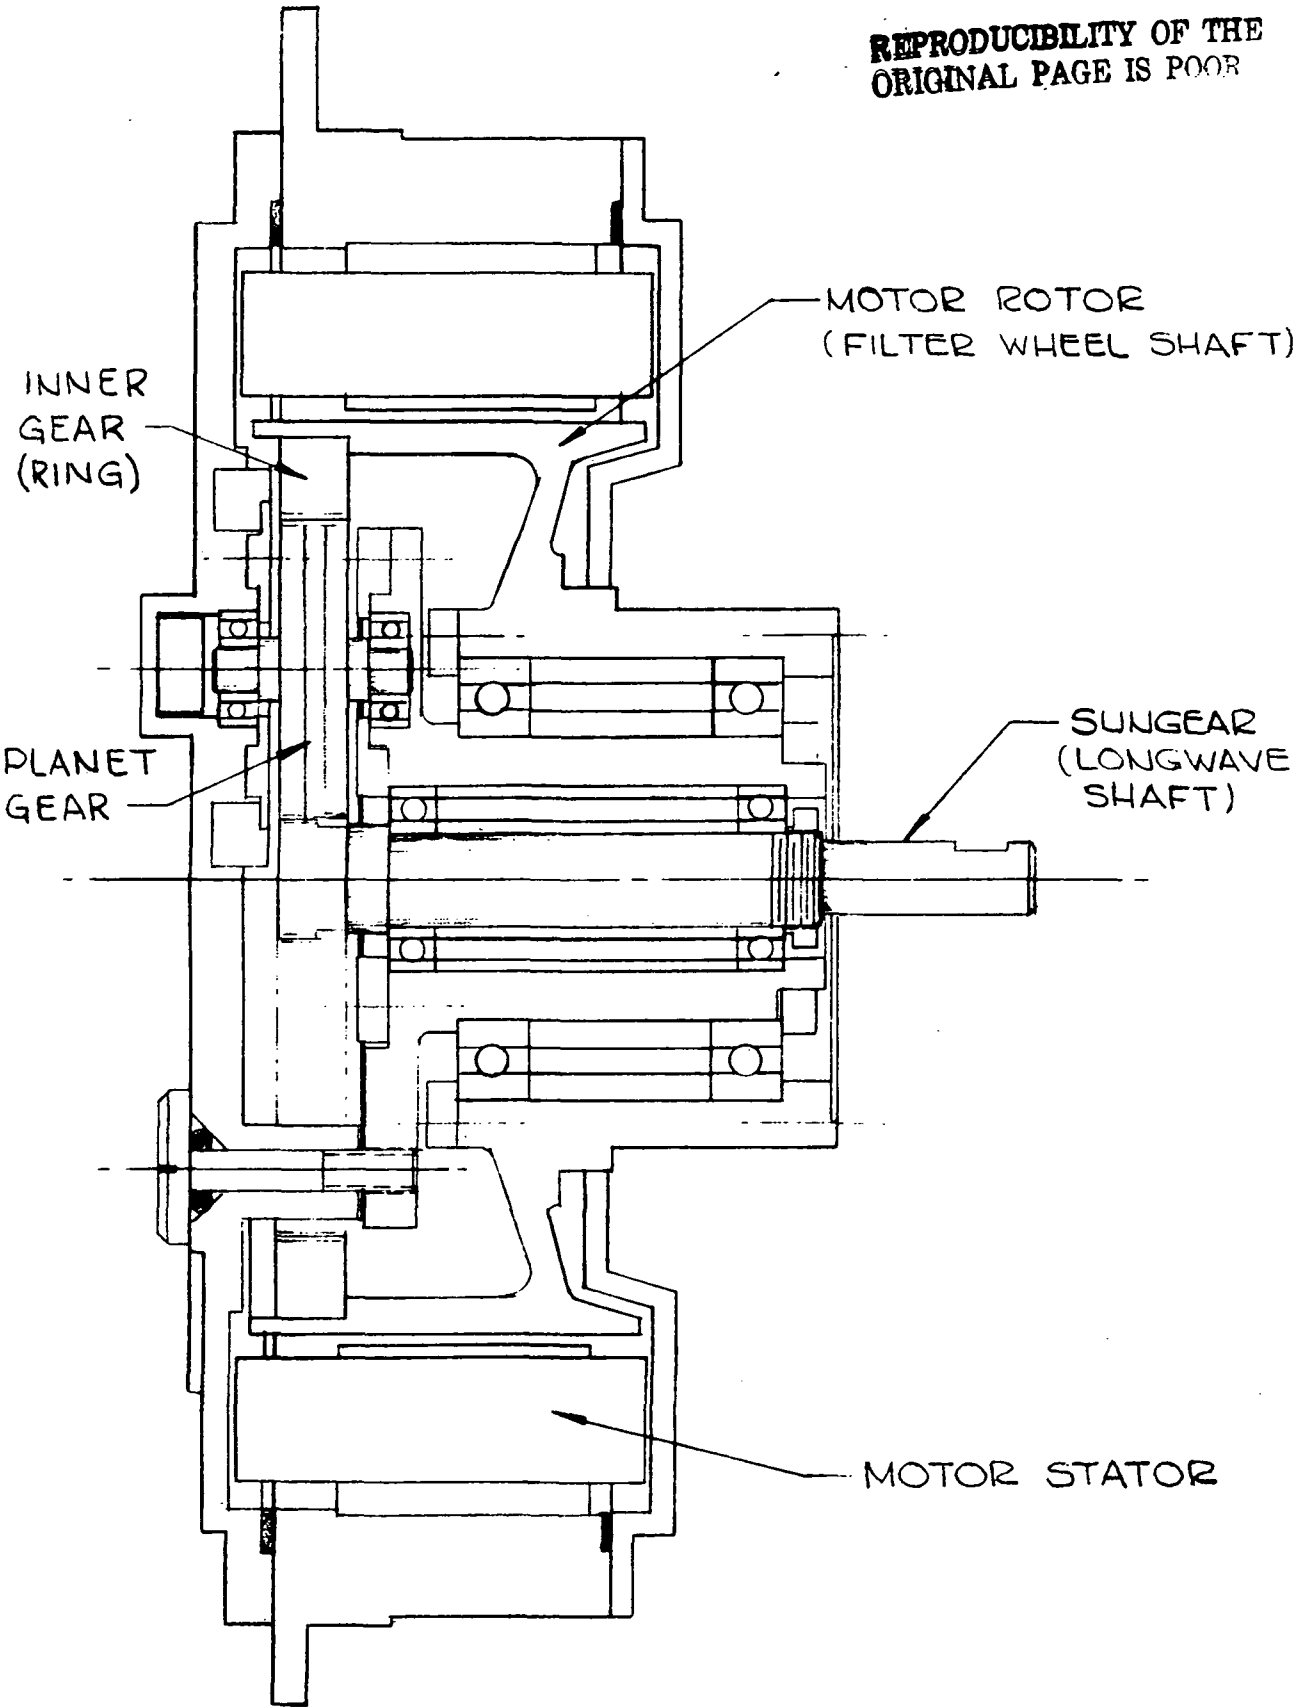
SECTION VIEW OF THE FILTER, CHOPPER DRIVE MOTOR ASSY
